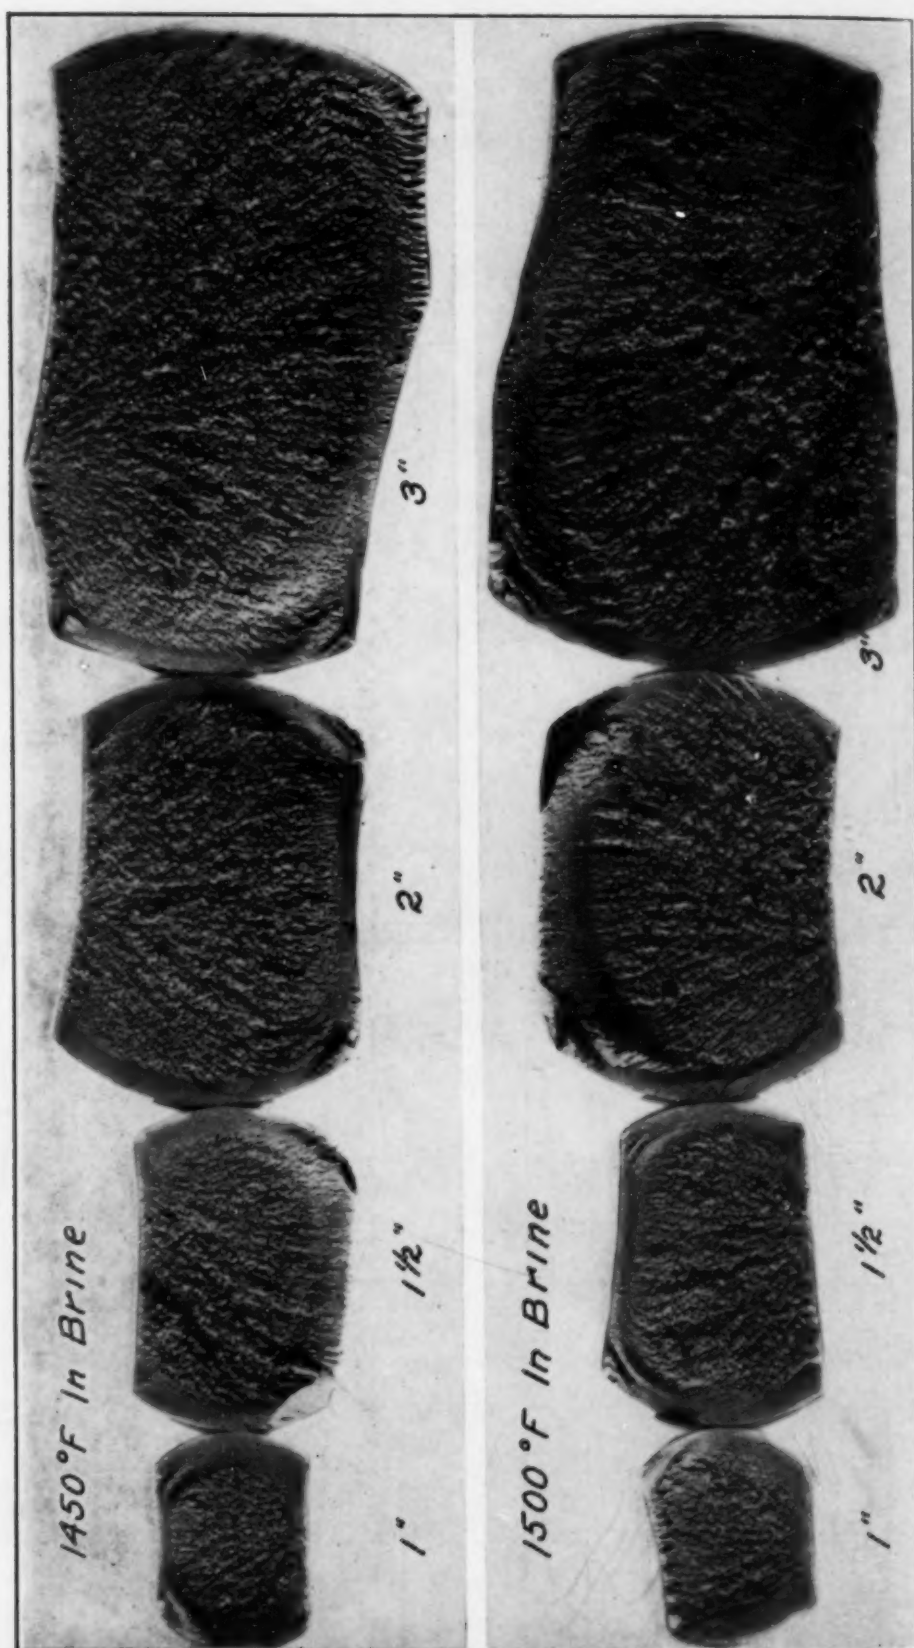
Fracture Grain Size of Carbon-Chromium Tool Steel (0.20 Per Cent Cr).
